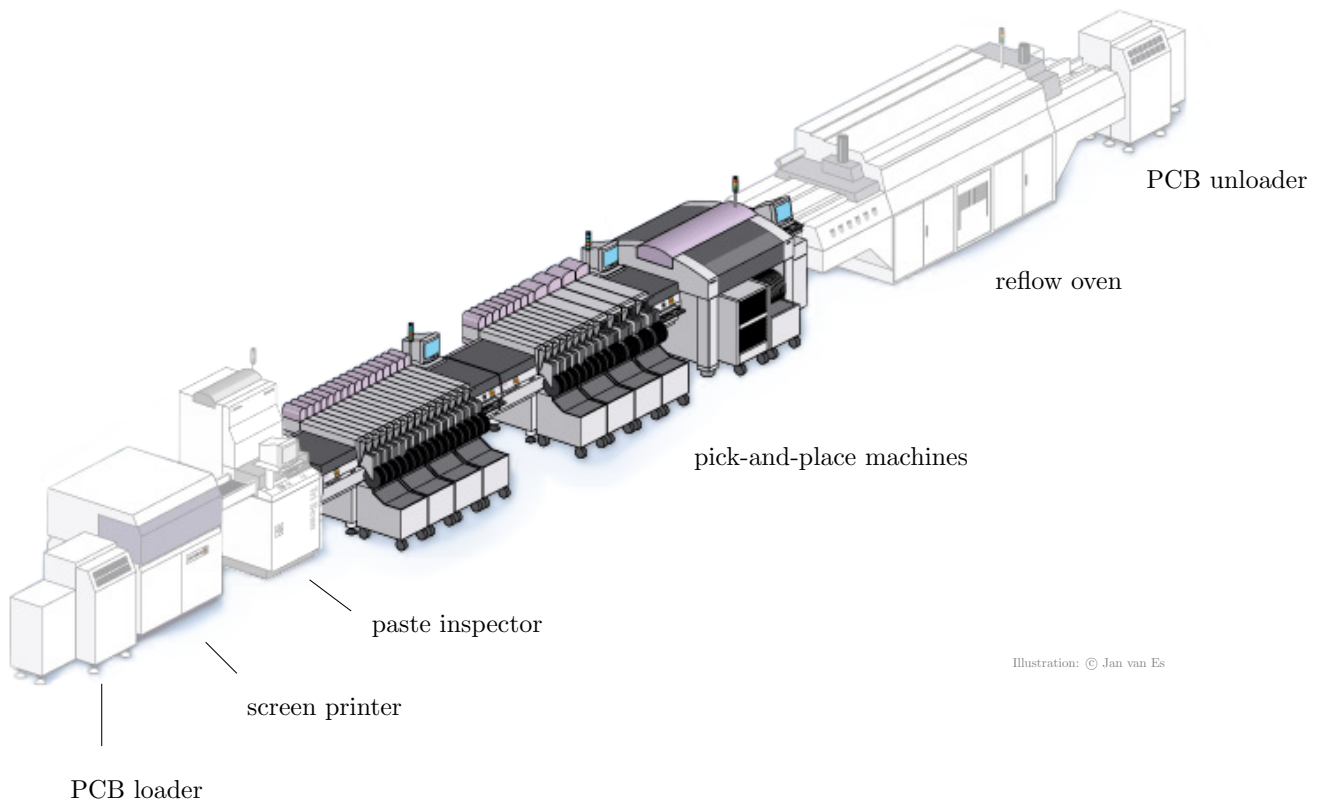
An example assembly line. In this thesis we focus on the pick-and-place machines mounting components on the PCBs.
